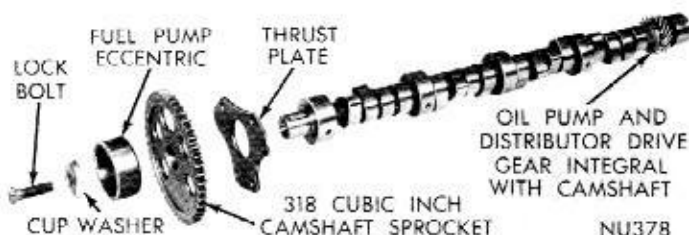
Camshaft and Sprocket Assembly (Disassembled View)
